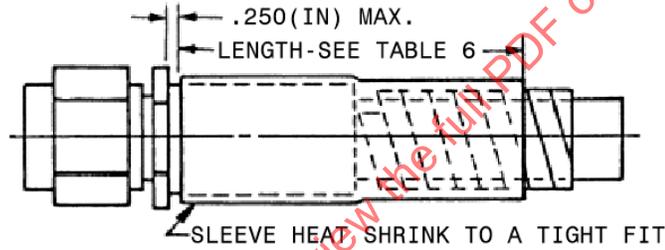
ABRASION SLEEVE ATTACHMENT /7/ /8/
